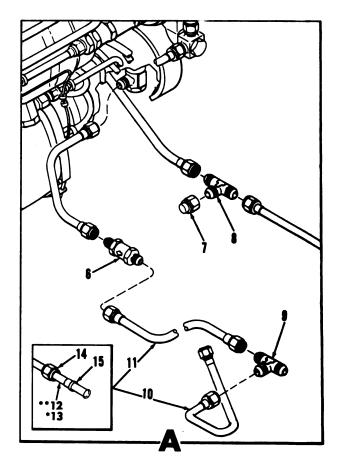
SYSTEM INSTALLATION, HYDRAULIC /9020507/
